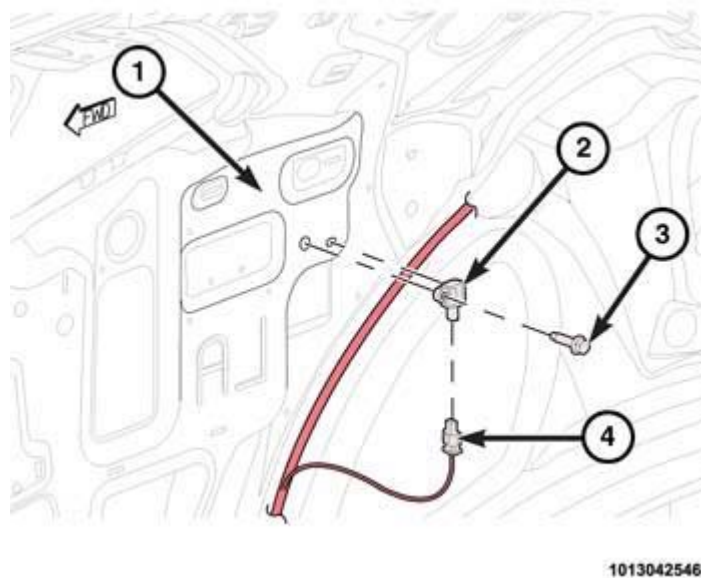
C-Pillar, Wire Harness Connector, Side Impact Connector & Screw
